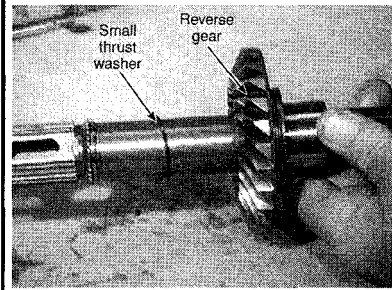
On some V6 models, a tiny thrust washer is installed on the shaft between the reverse gear and the clutch
